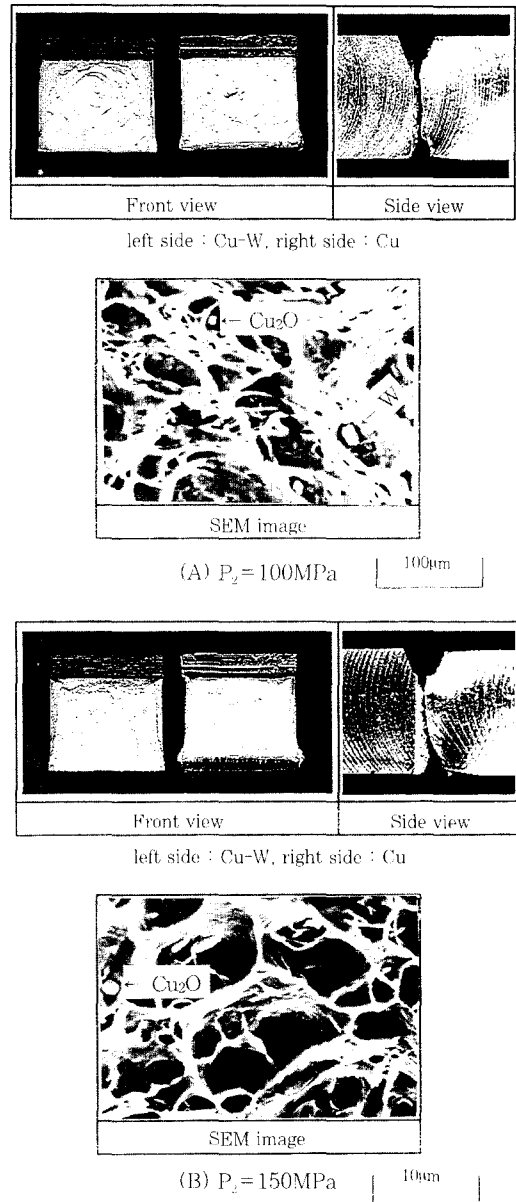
Impact fracture surfaces($t_1 = 0.8\text{sec}$)
